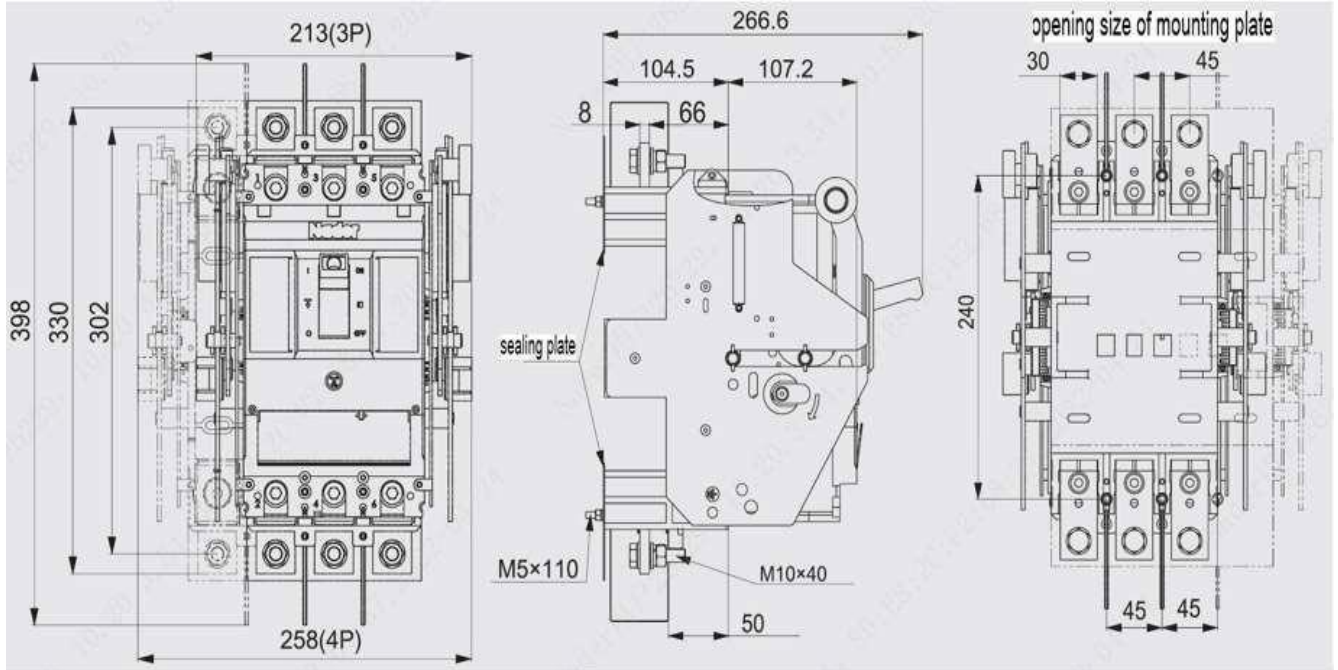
3P、4P Outline dimensions drawing of withdrawable front panel board wiring products
